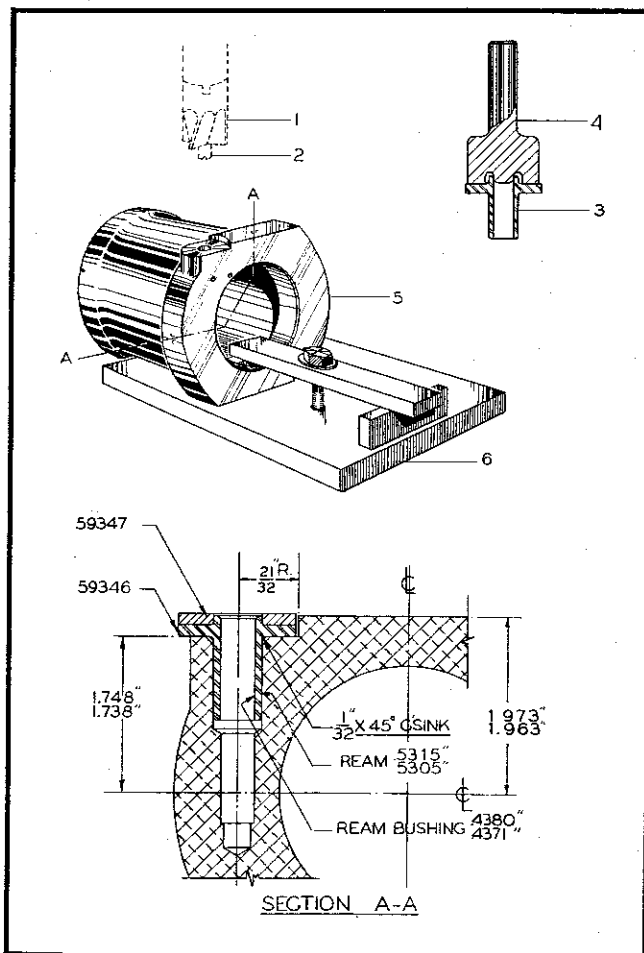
Modification of 2B20 Counterweight Bearing Shaft Bushing
